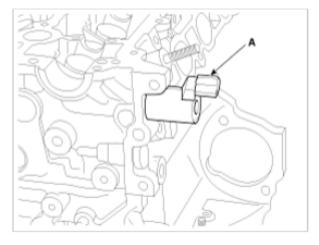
Identifying Oil Control Valve Courtesy of HYUNDAI MOTOR AMERICA
